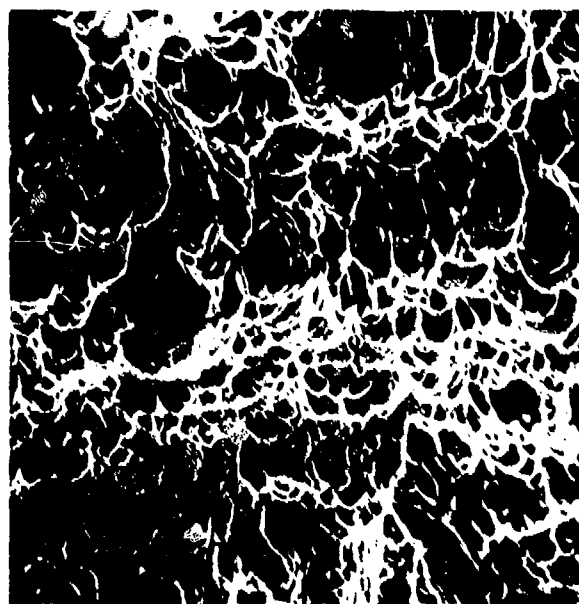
Edge region of A-514 weld Charpy specimen tested at room temperature, 1700x.
